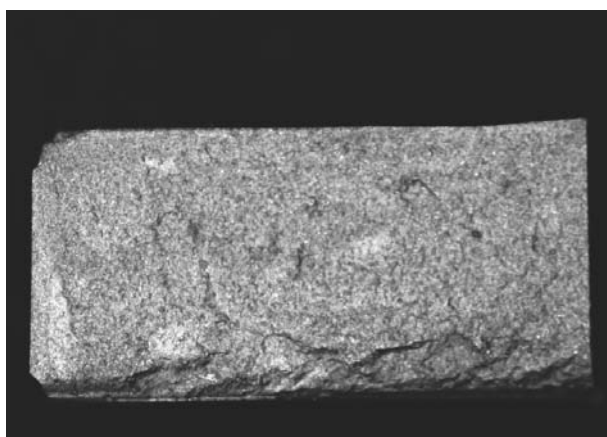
View of the fracture surface of injected S30S60SA4 materials
